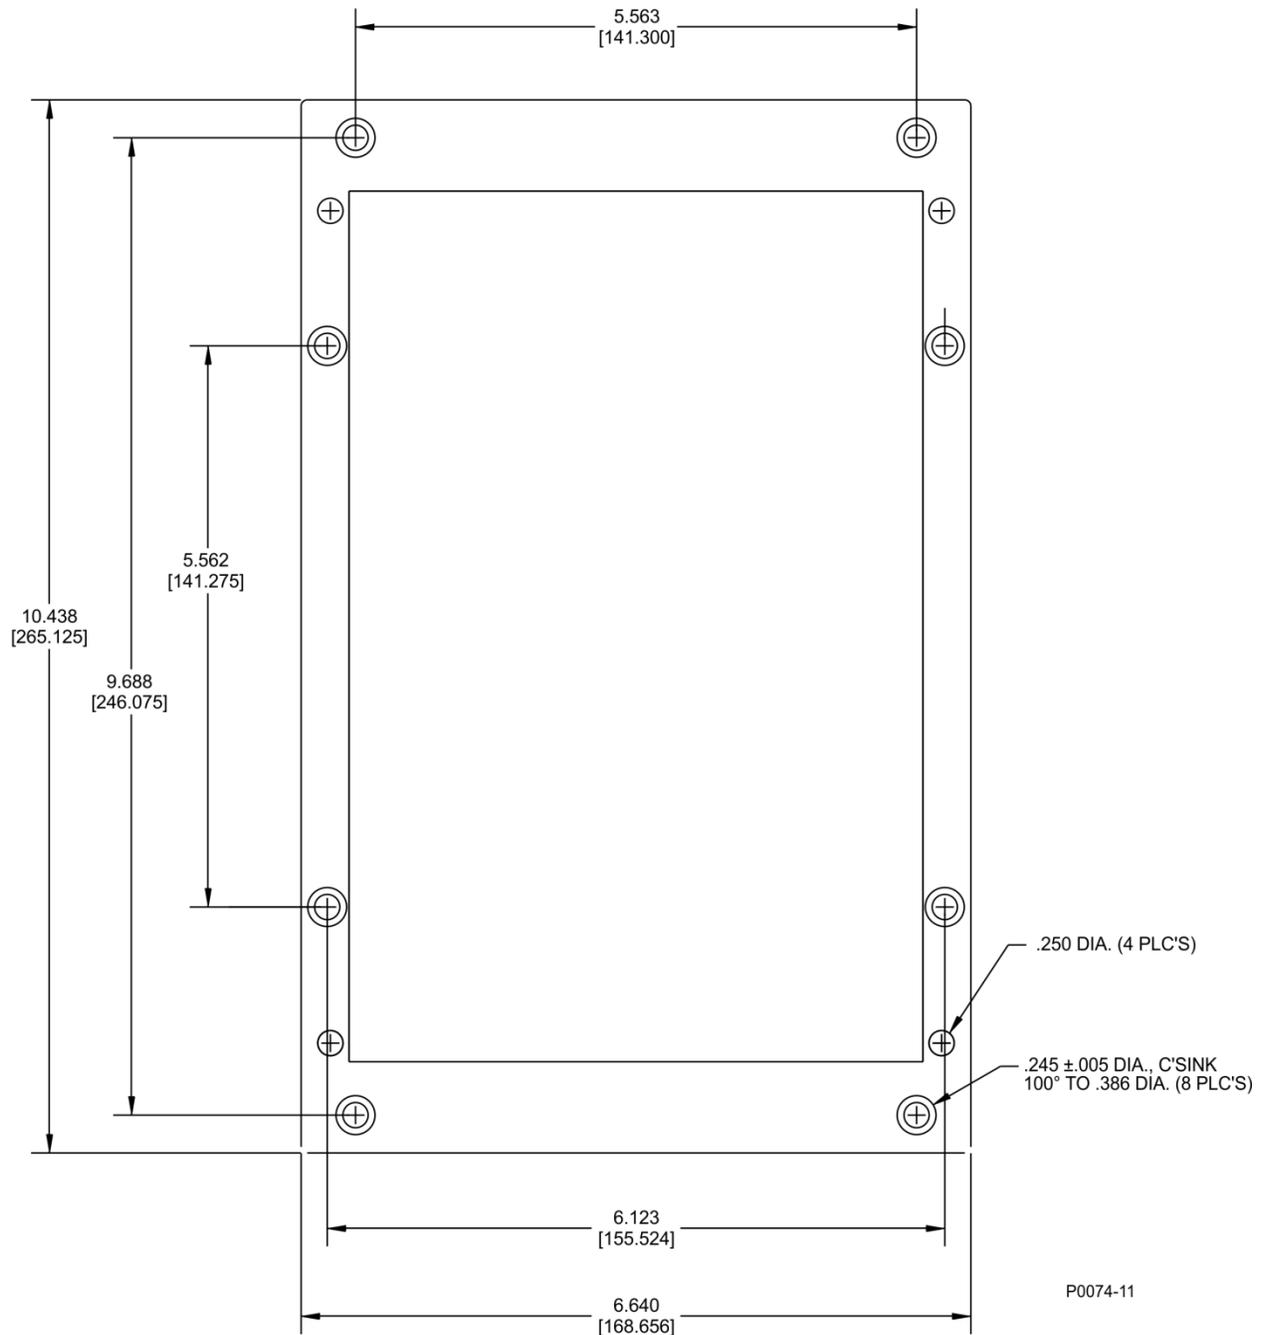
GE S2 and ABB FT-21 Adapter Plate (Basler P/N: 9108551021)
